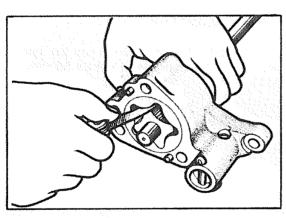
Measuring the Clearance between the Inner and Outer Rotors
